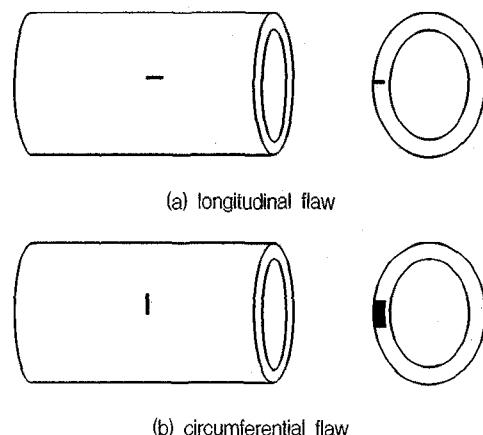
Shape of the fabricated flaws in a steel tube specimen
